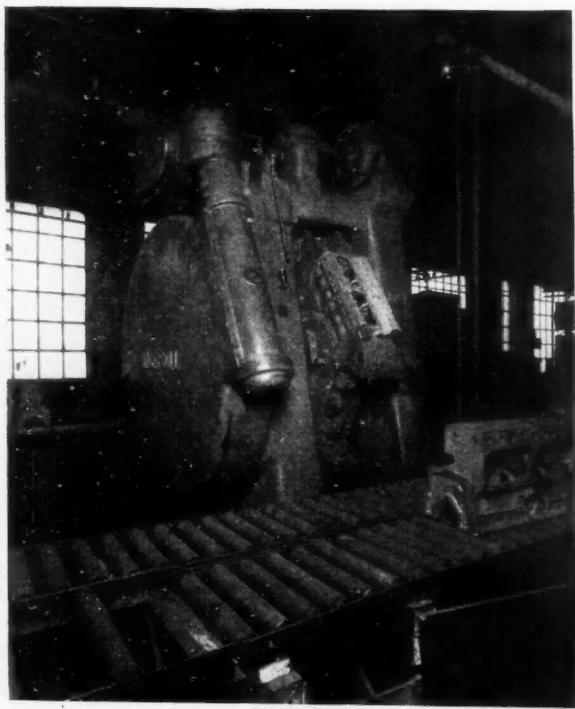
Two Ingersoll milling machines are used to rough and finish mill the upper faces of Hupmobile engine blocks. A second machine, which is not shown, is opposite the machine in this view, on the other side of the conveyor
